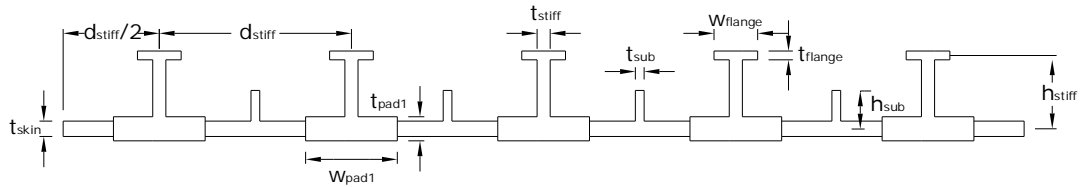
T shaped stiffened plate with substiffeners and pads under stiffeners
